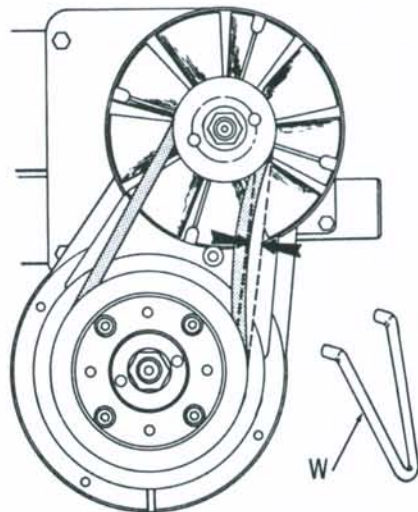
On axial fan models, cooling fan drive belt should have approximately 3/8-inch deflection when finger pressure is applied at point shown by arrows. A pin-type spanner wrench (W) is used to hold fan pulley to remove shaft nut.
